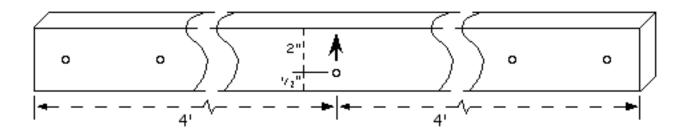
Drilling and Marking Special 1 x 3's (C Pieces)
